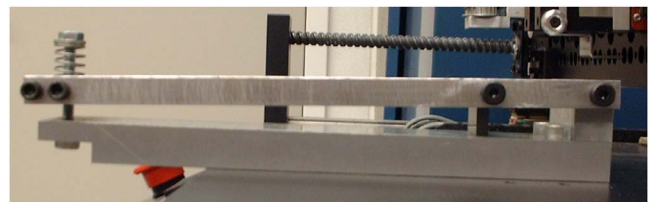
Photograph of the welding fixture mounted to the welding table. A description of the fixture based on the lower figure: the arms pivot at the far right of the photograph. The “absorbing” part is placed in a slot approximately 2 in. from the pivot and the “transparent” part is placed on top of this part in a T-joint. This “transparent” part is held in place by a rotating carriage, which is the second pivot on the pair of arms. On the far left side of the arms, a precision spring is used to apply pressure. By compressing the spring a specified amount, a known load is applied, allowing the clamping pressure in the weld zone to also be known.
